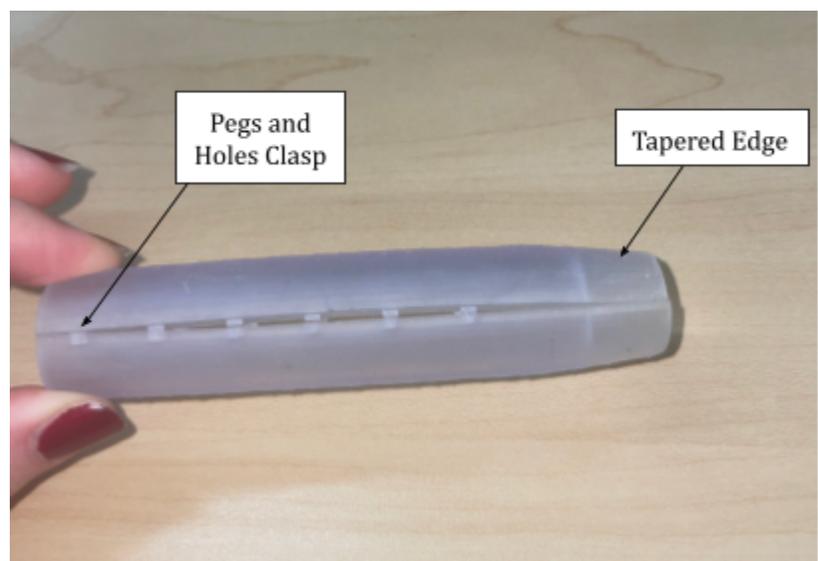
Final "Lego" 3D printed prototype with some evident bowing.
